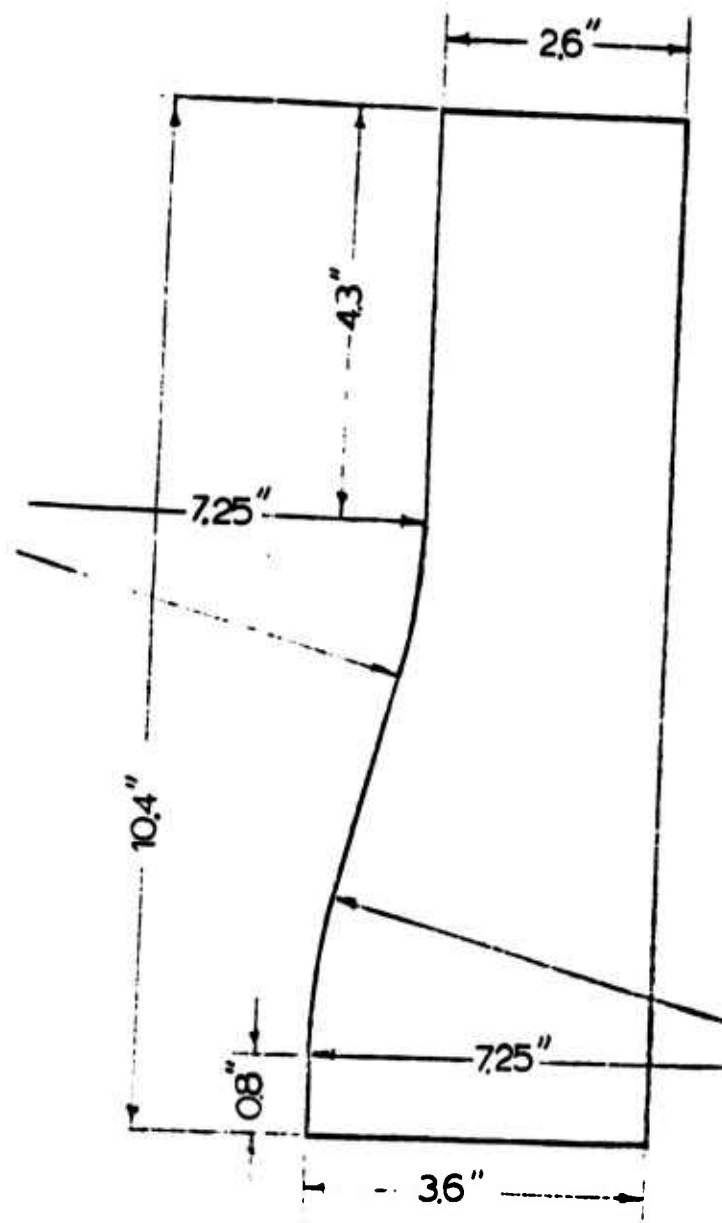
A Sketch of the Dimensions of the Control Jet Nozzle Piece.
